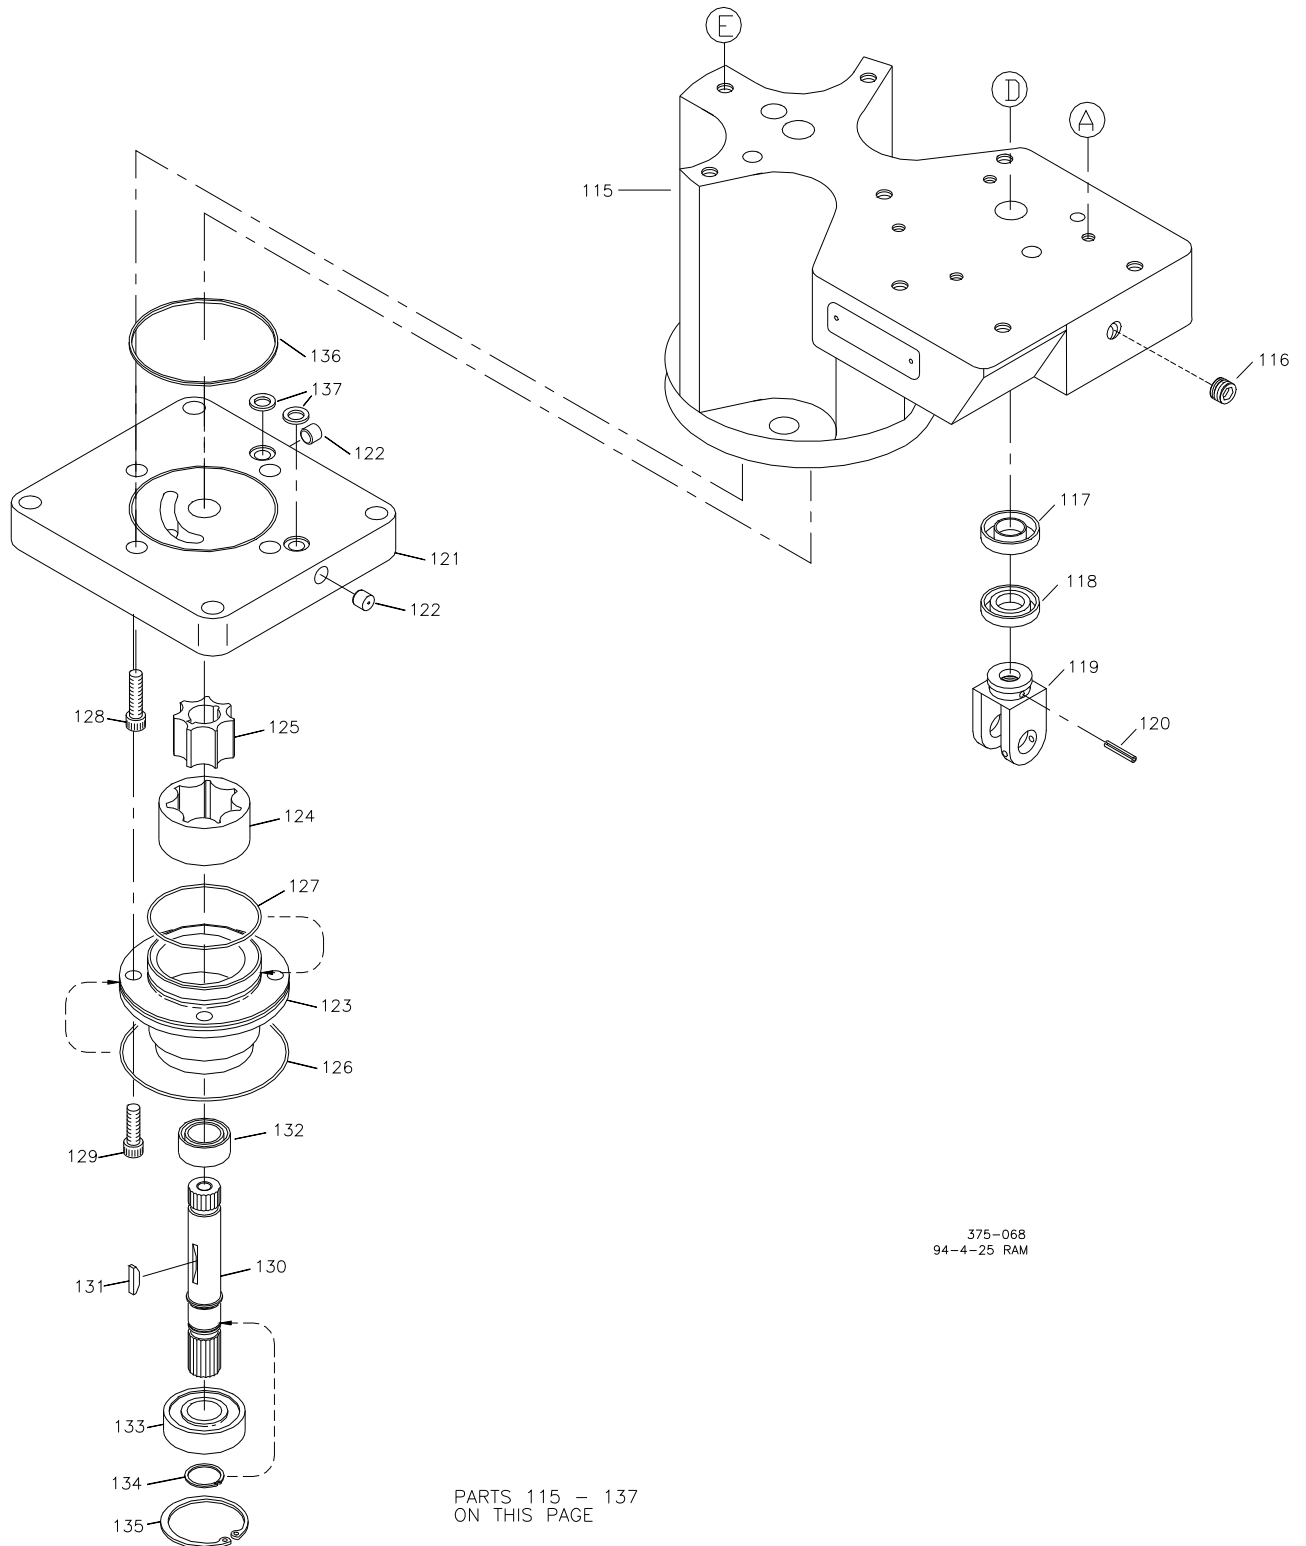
Exploded View of PG Actuator Lower Assembly (linear output/UG base)
